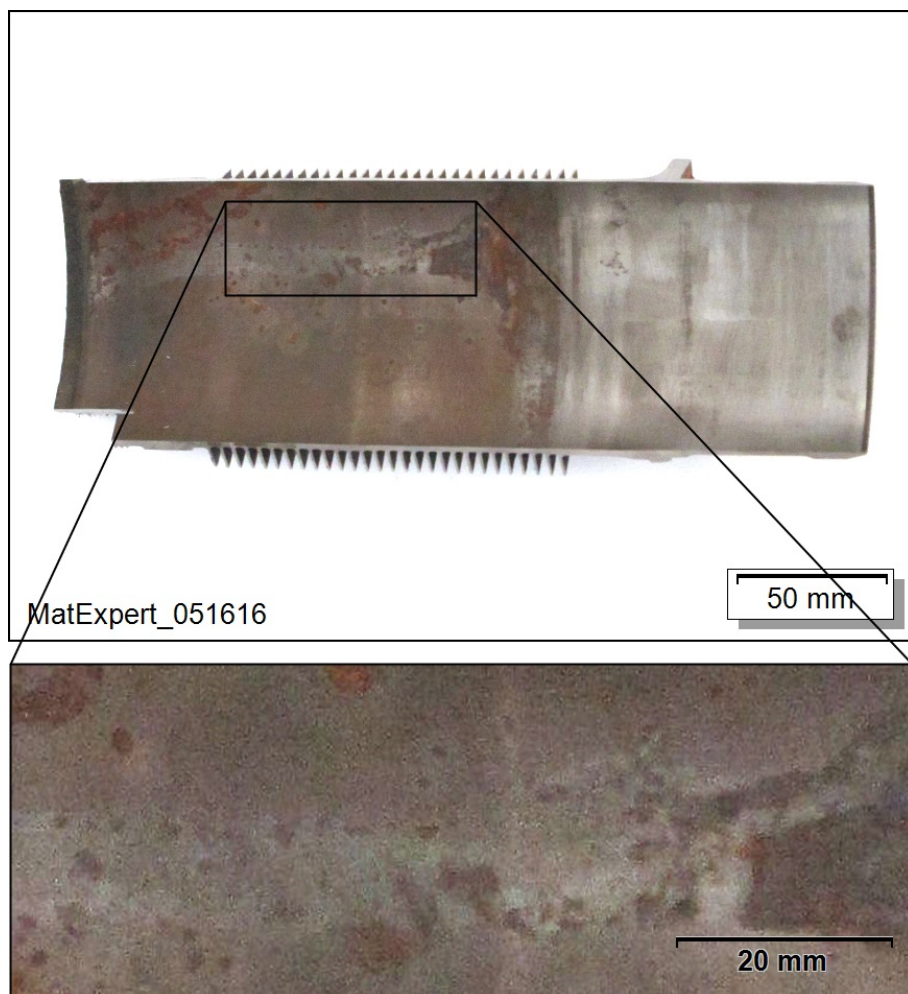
Right engine, bore of cylinder 1 – rusty surface.
